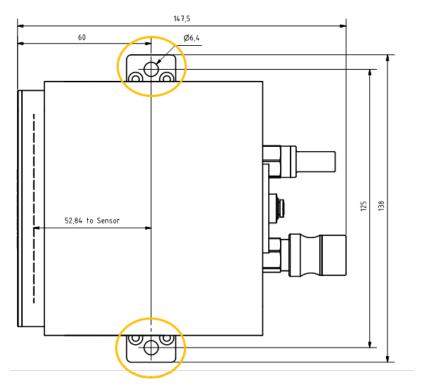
Drawing of the PILATUS3 X 100K-M Detector Head with extended Mounting Brackets (top view)
